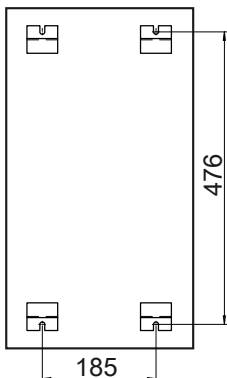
Drilling pattern for wall mounting, dimensions [mm]
